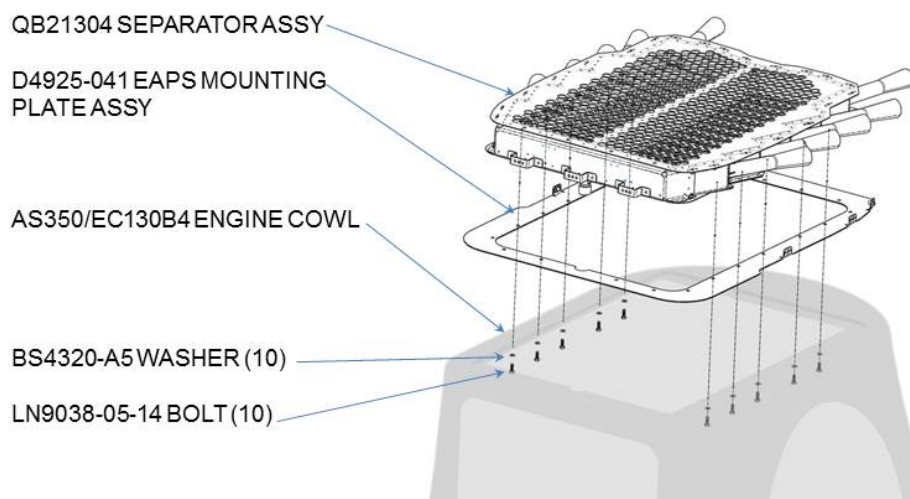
EAPS Panel Assy/D4925-041 Mounting Plate Installation
